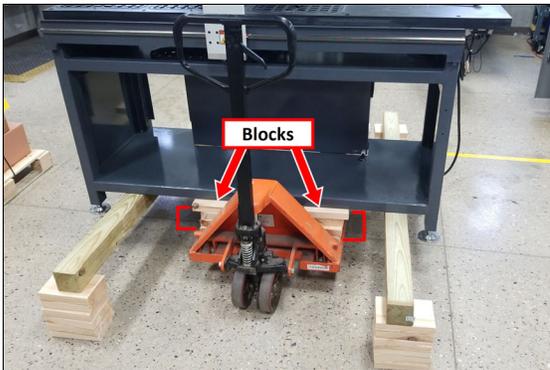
Lifting the machine from the boards with a pallet jack (and additional boards).
